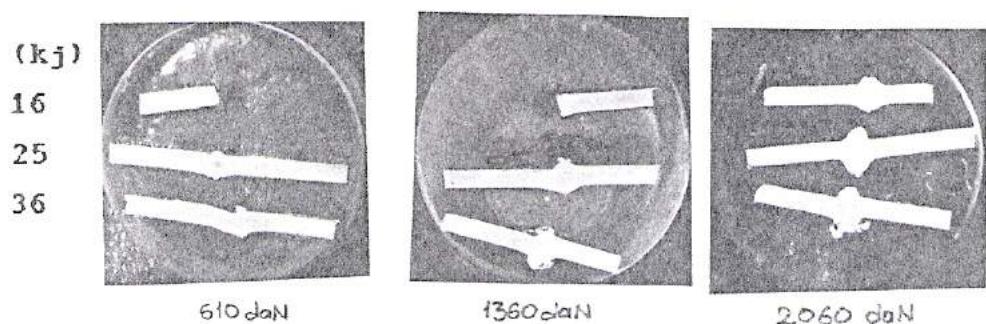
Weld-seam cross sections with different level of heating and upset force (the axis of the tube is always below).
